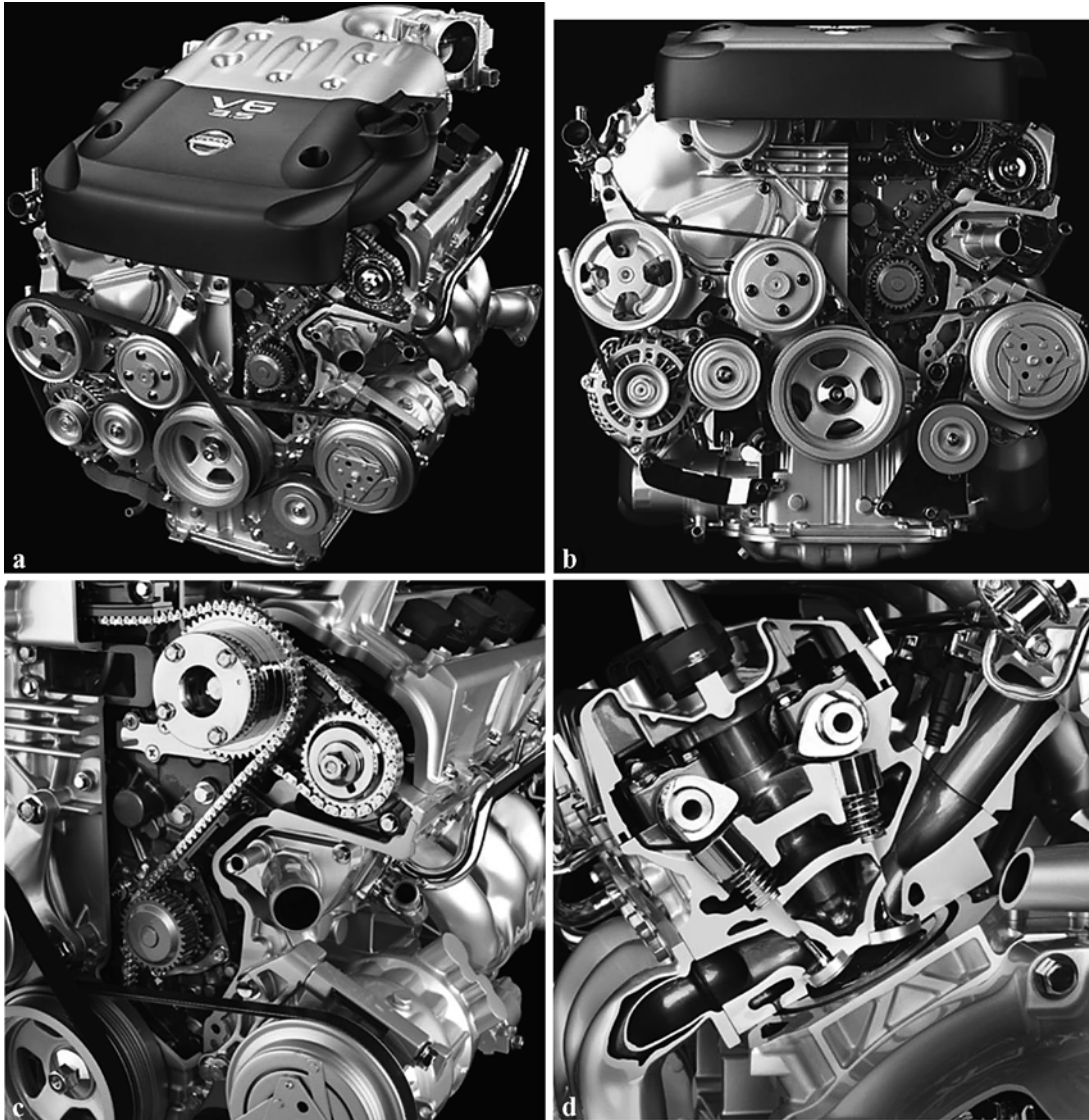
a–d. Double-overhead-cam V-6 engine. a Cut-away shows cam drive chain. b Front view showing serpentine belt accessory drives and cam drive cut-away. c Details of cam drive, showing variable-timing device for the intake camshaft. d Cylinder head, intake and exhaust manifold cut-away (courtesy of Nissan Motor Company)
